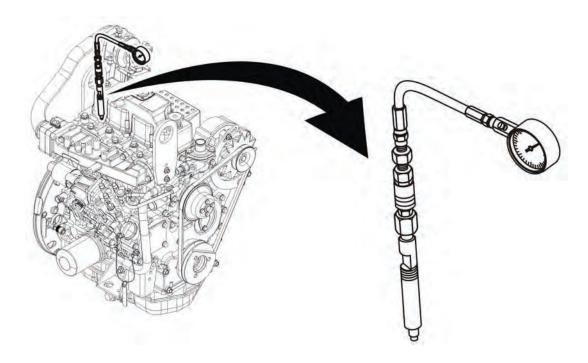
Compression Gage in Fuel Injector Opening — Location.
